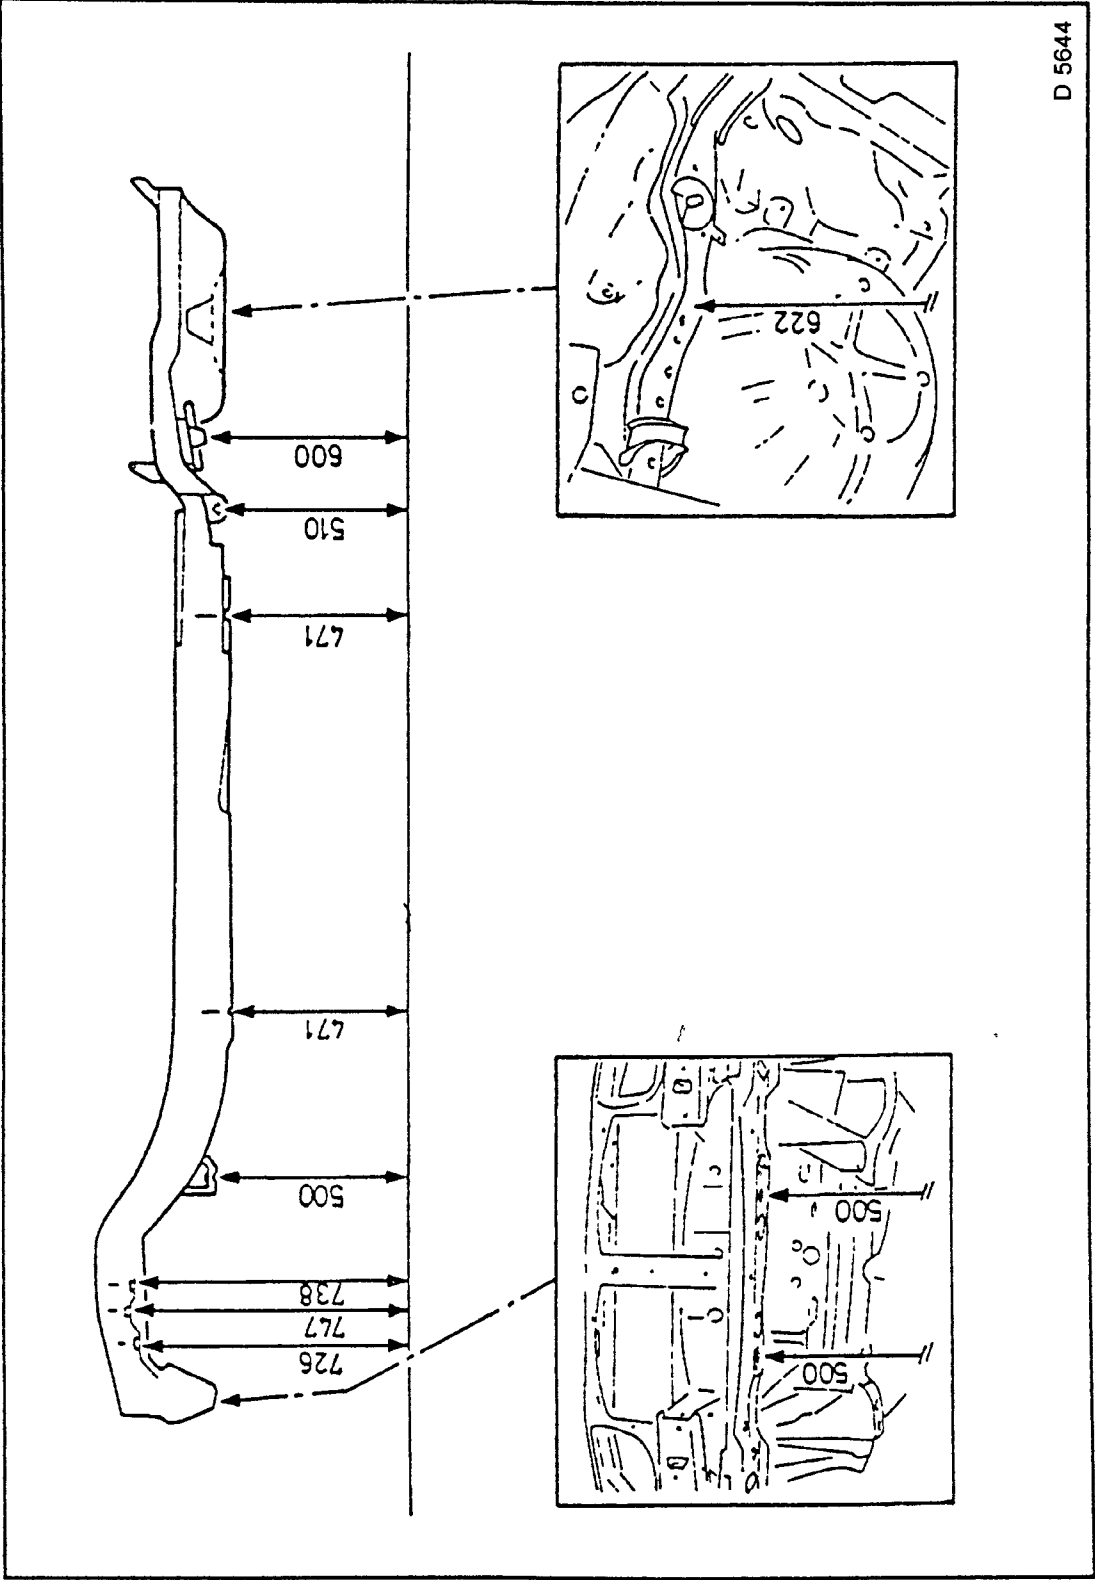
RIGHT SIDE MEMBER — ON FRONT AXLE BODY WITH LONG OUTRIGGER
